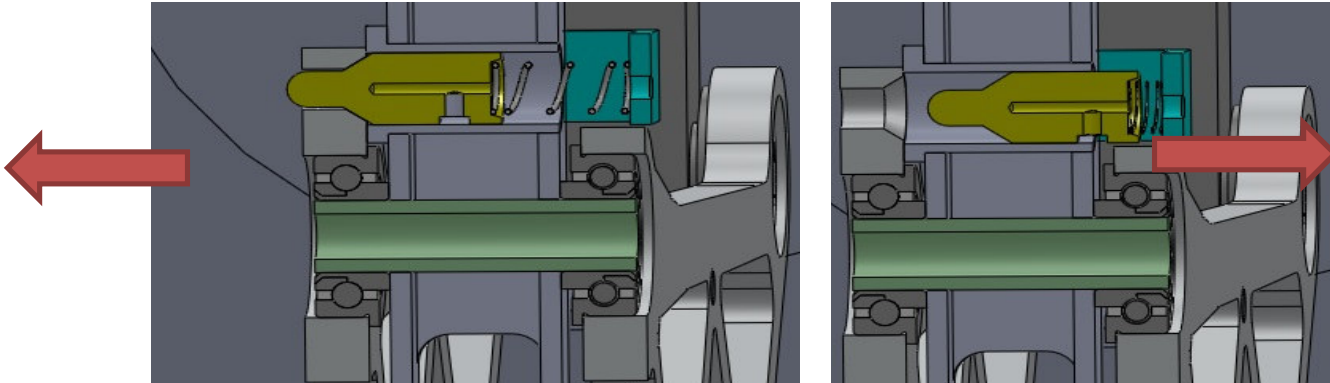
Cross Section of Trike Upright Locking Mechanism with pin engaged (locked upright, left) and pin removed (free to tilt, right)
